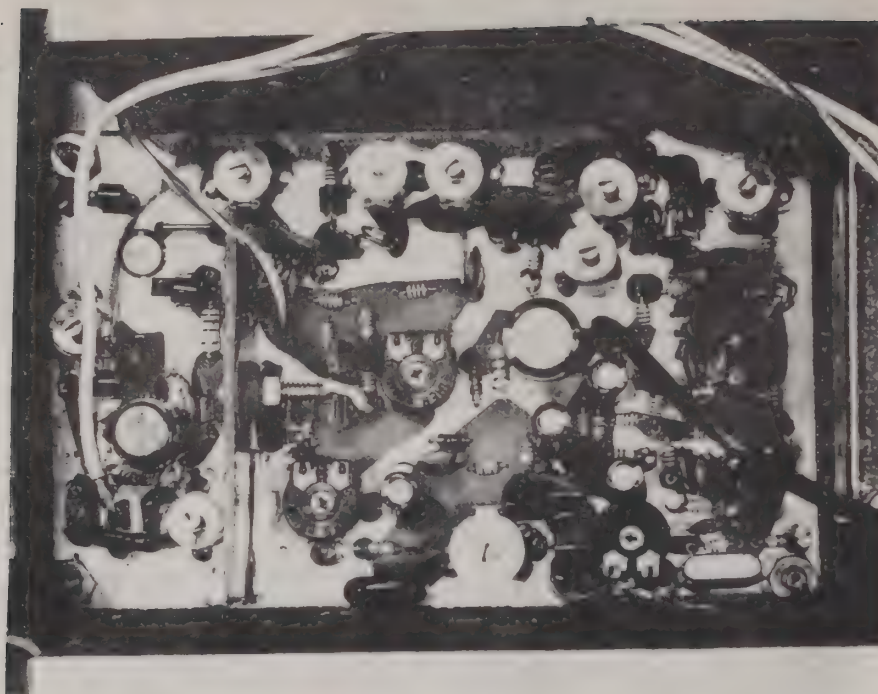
THE FINISHED PC BOARD has a neat, clean appearance. Sloppy workmanship can not be tolerated on this circuit layout.
